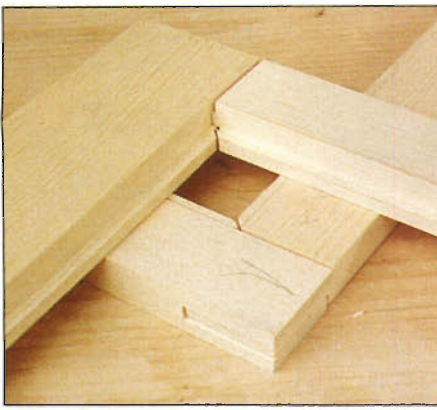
Photo Q: The partially assembled door parts on top show the rabbeted back face; those on the bottom show the mitered front face (before the bevel has been cut).
